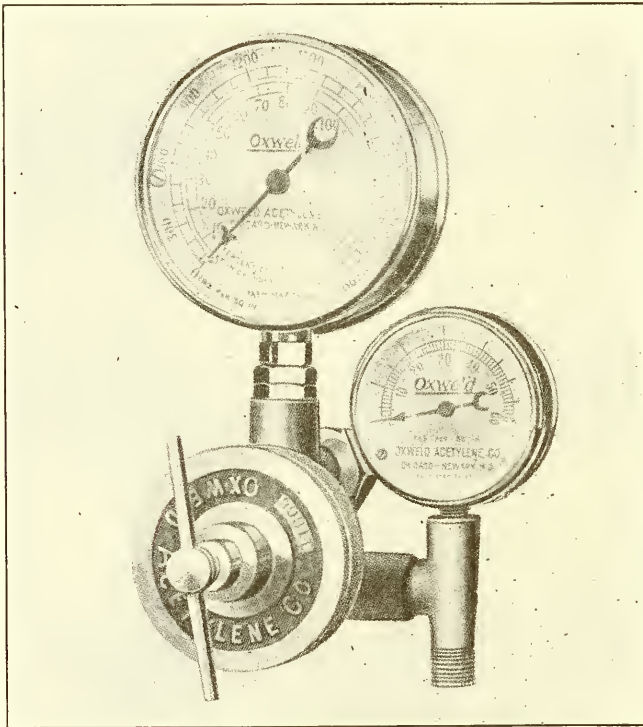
Oxweld Oxygen Welding Regulator.
